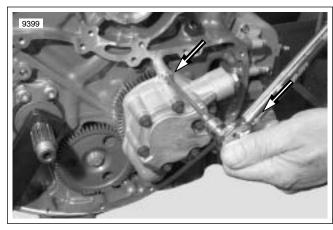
Oil Pump Installation @ 9.7 Nm (86 in-lbs)
